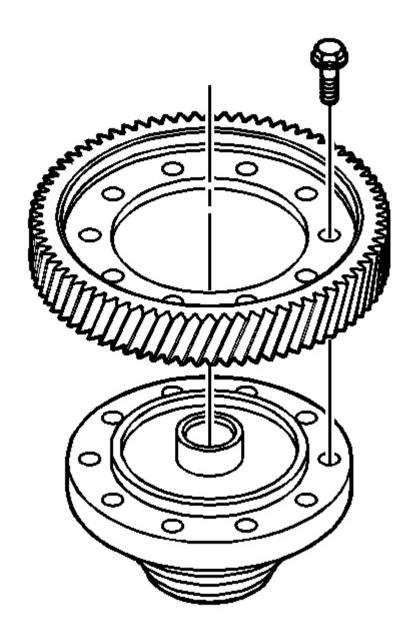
Differential Ring Gear & Bolts Courtesy of GENERAL MOTORS CORP.
